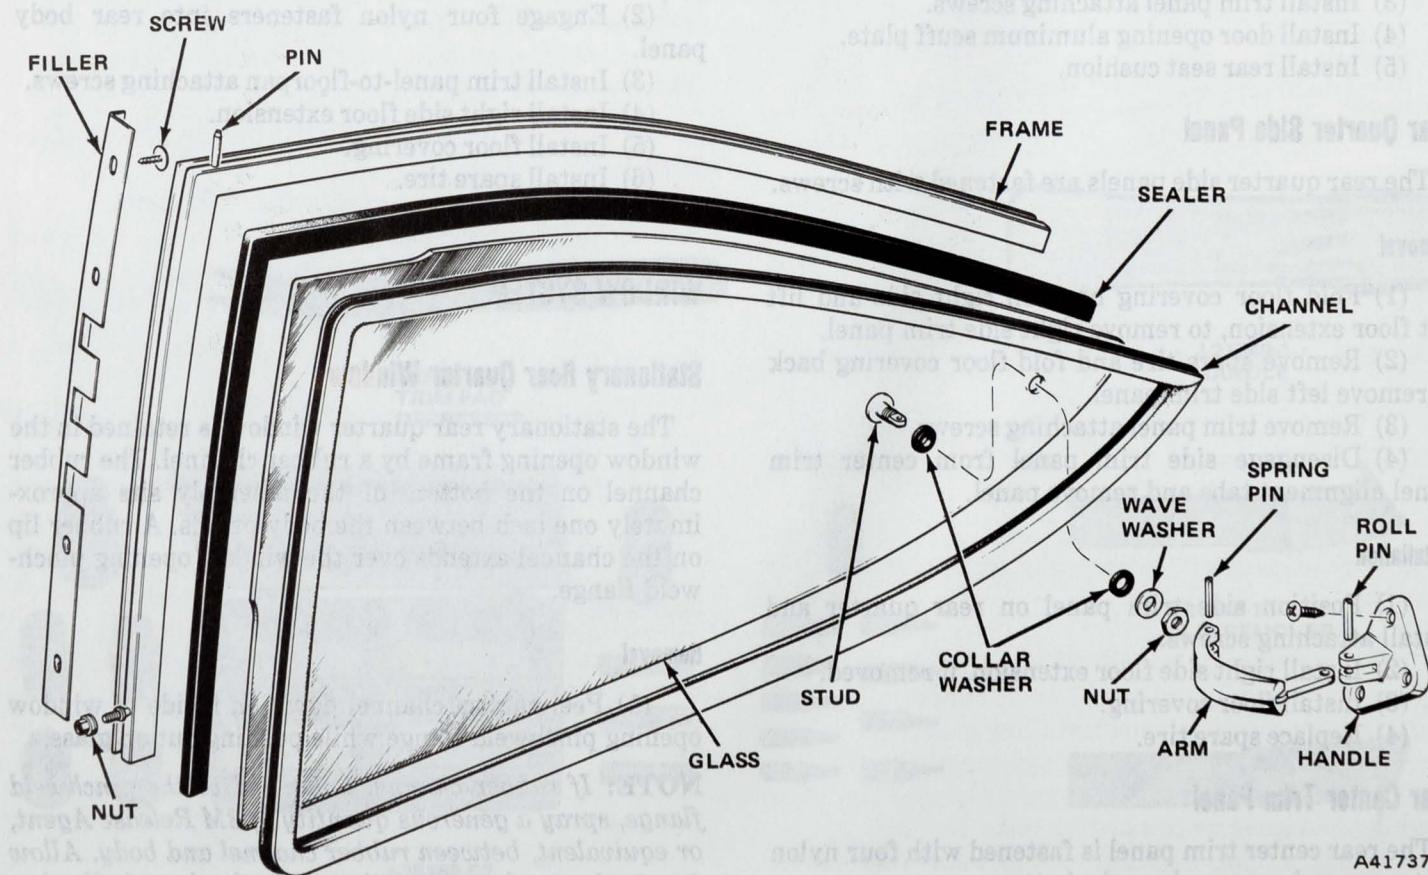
K-6 Swing-Out Rear Quarter Window Assembly
